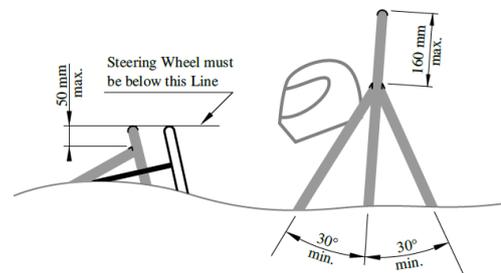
Requirements for front hoop bracing, main hoop bracing, and steering wheel bracing [18]
